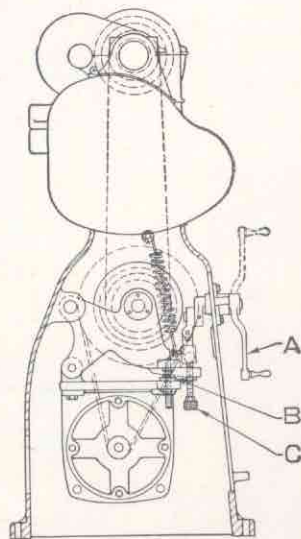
Underneath Motor Drive Arrangement for 10" and Larger Floor Type Lathes
